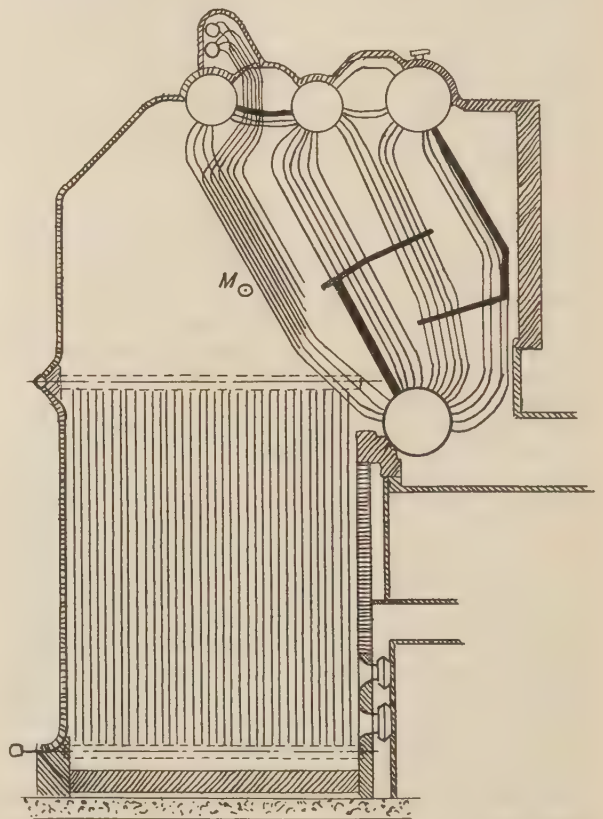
ALL WATER COOLED COMBINATION GAS- AND OIL-FIRED BOILER
